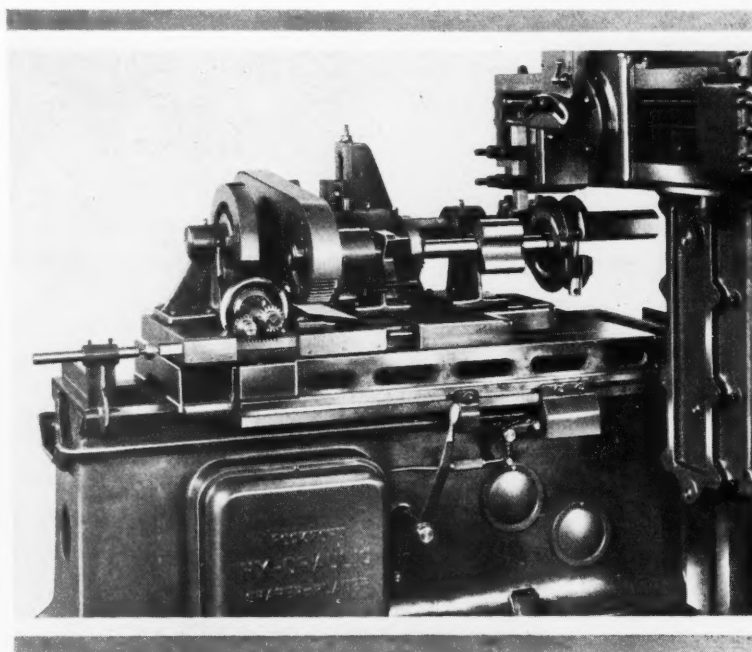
Pump Rotors Machined on a Rockford Hydraulic Shaper-planer at the Plant of the Waterous Co., St. Paul, Minn., in Slightly Less than Two Hours
